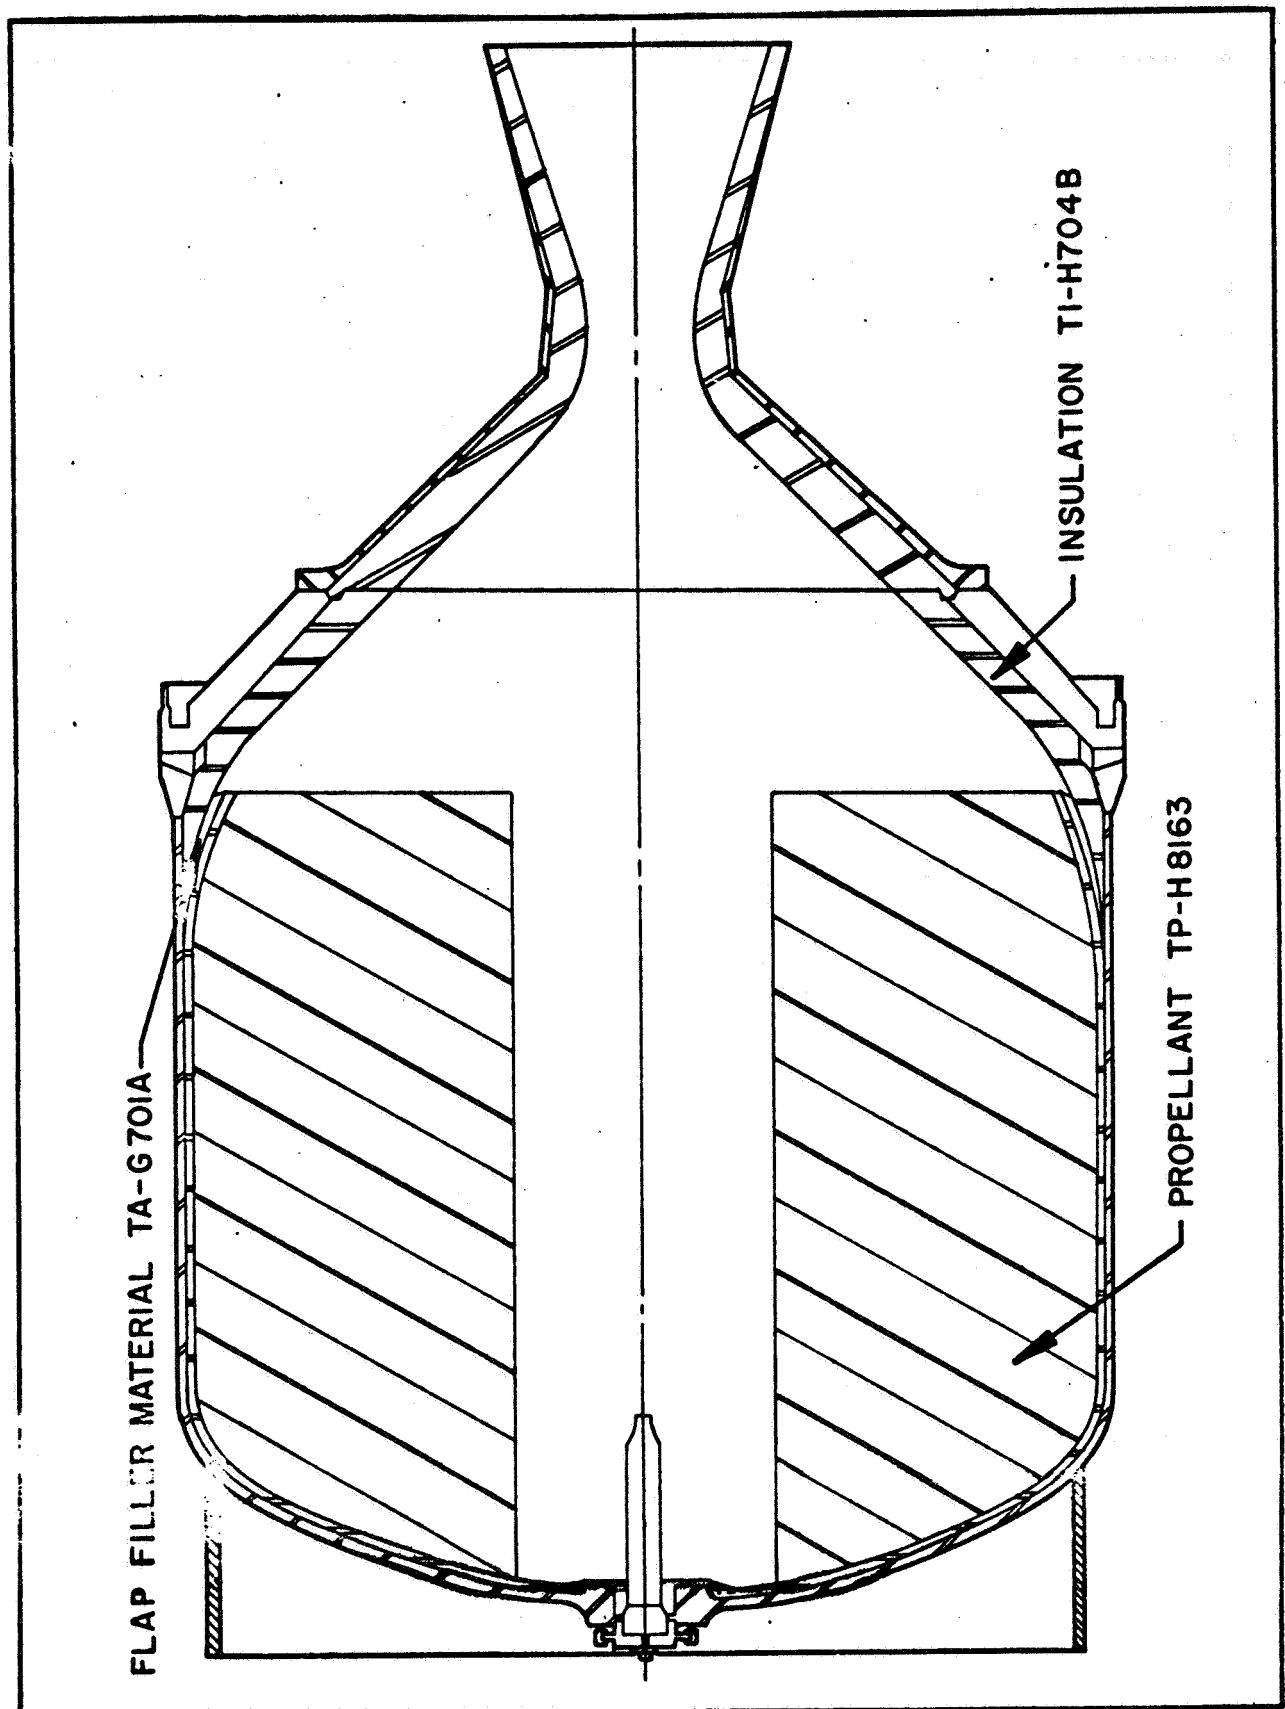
Sectional View of the 65-SS-3 Static Test Motor
